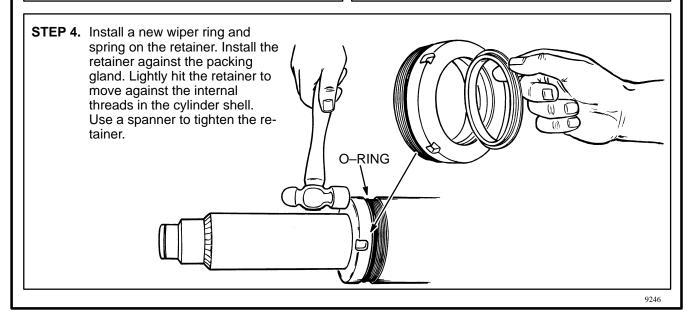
INSTALLATION OF CHEVRON PACKING IN A PACKING GLAND
